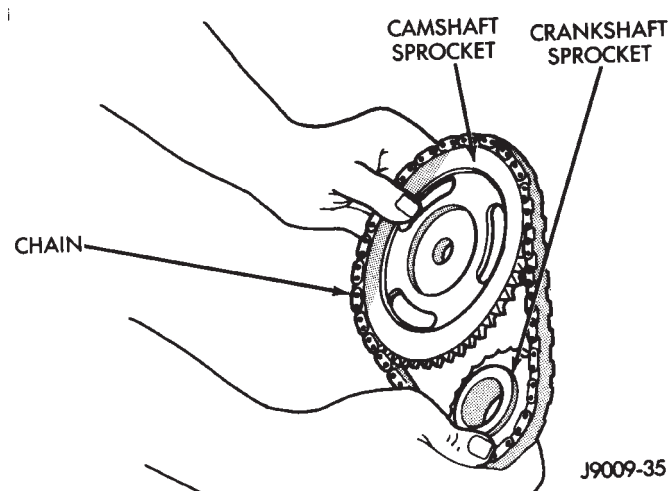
Camshaft and Crankshaft Sprocket and Chain
